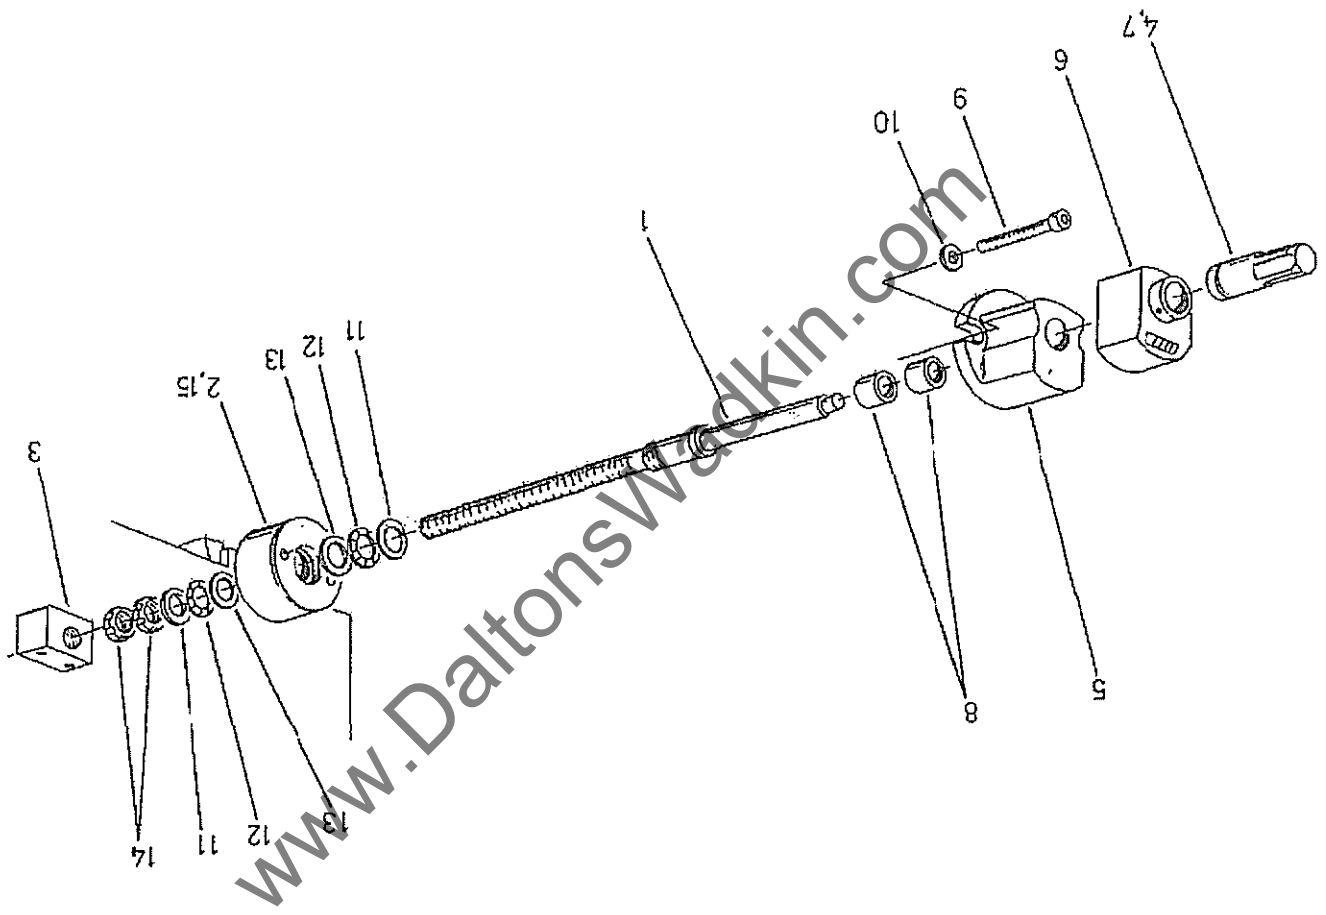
NEAR SIDE HEAD LATERAL ADJUSTMENT
